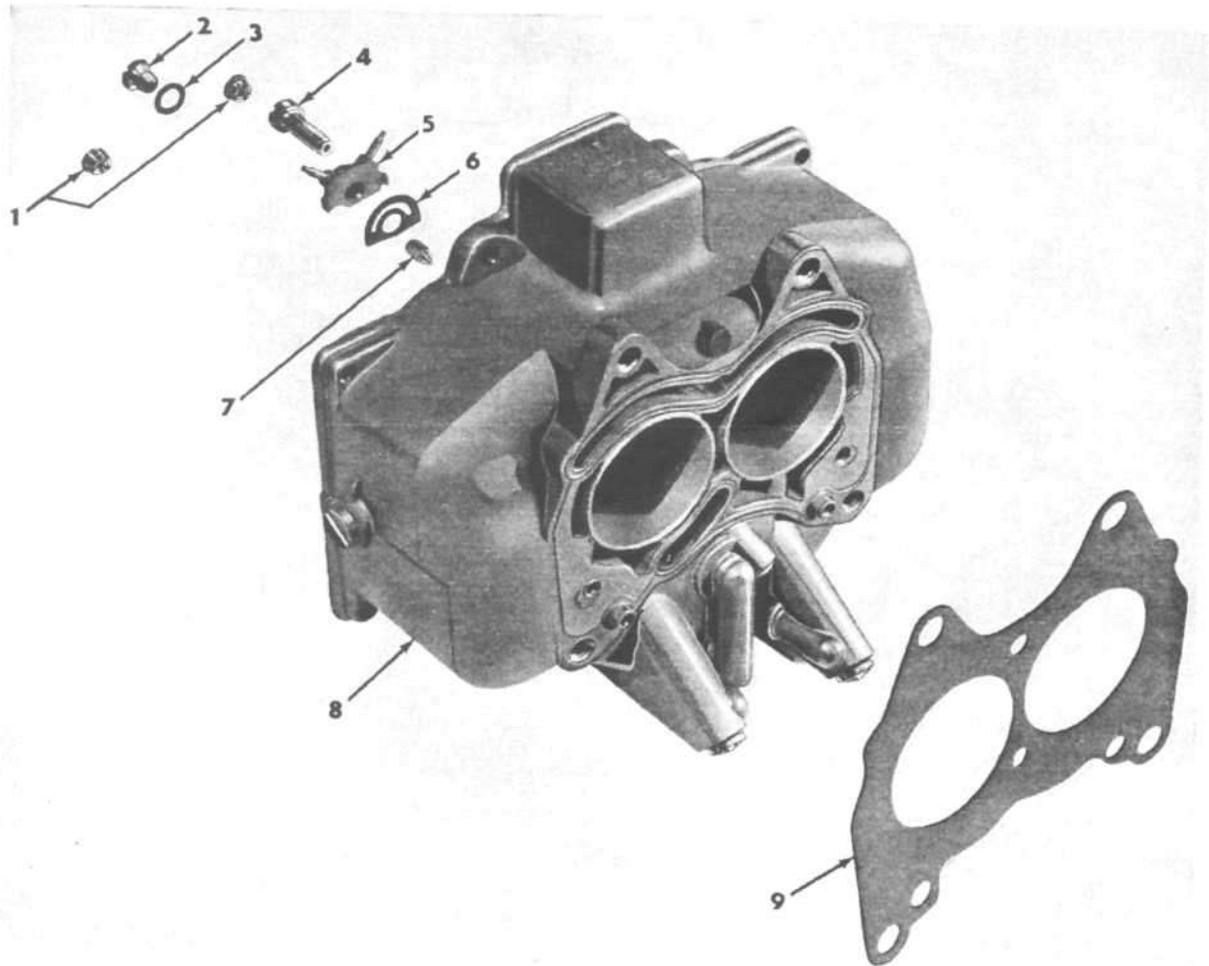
2204S CARBURETOR BOWL AND ATTACHING PARTS
